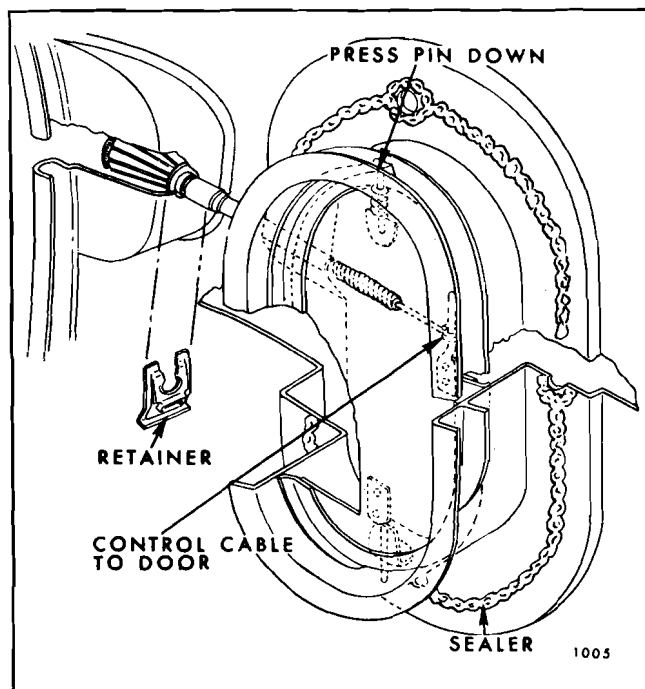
Shroud Side Finishing Panel and Air Outlet - "Z-37" Styles
